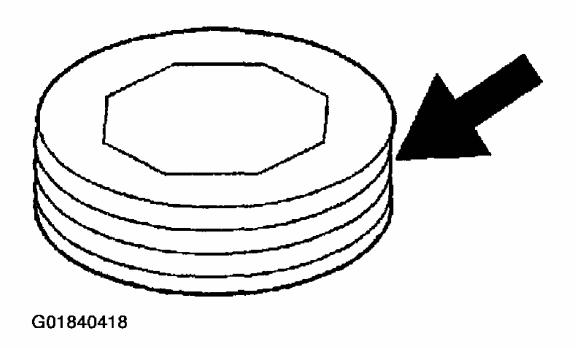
Applying Sealant To Oil Drain Plug Threads
